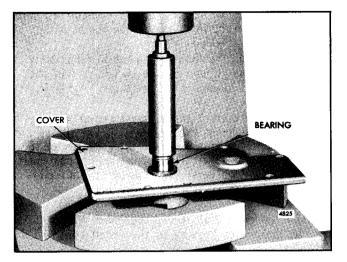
Installing Bearings in Governor Cover using Tool J 21068
